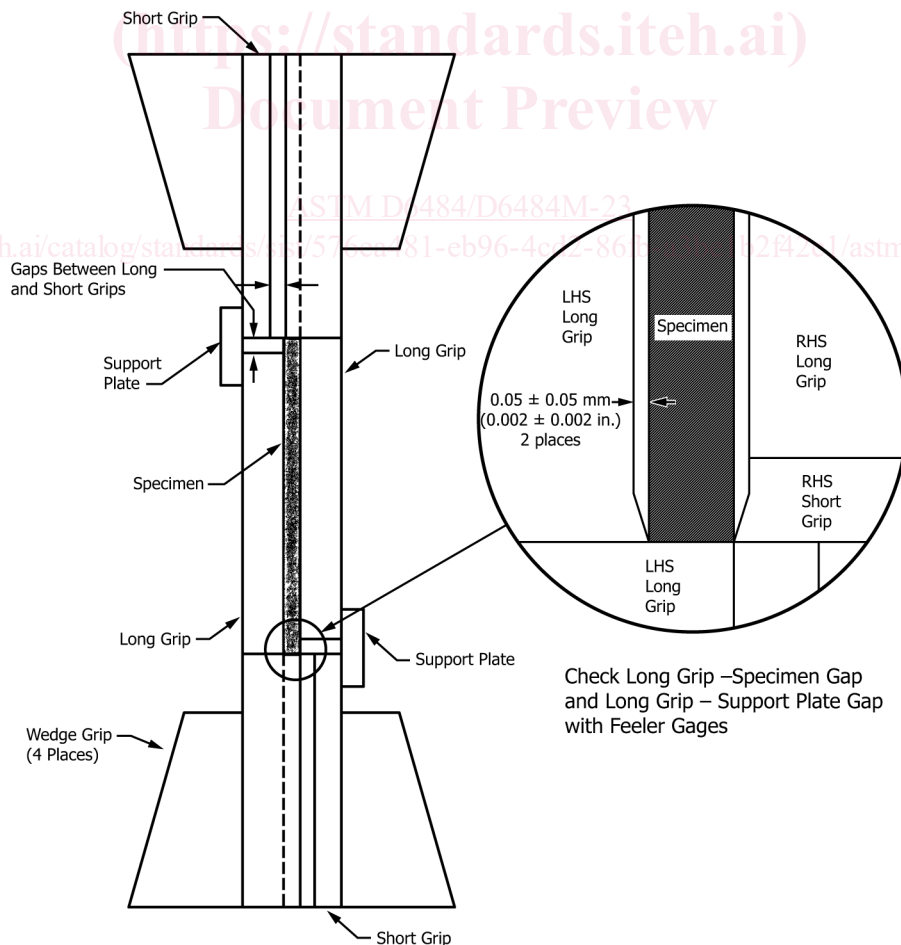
Specimen/Fixture/Grip Assembly, Procedure A (Hydraulic Grip Loading)
